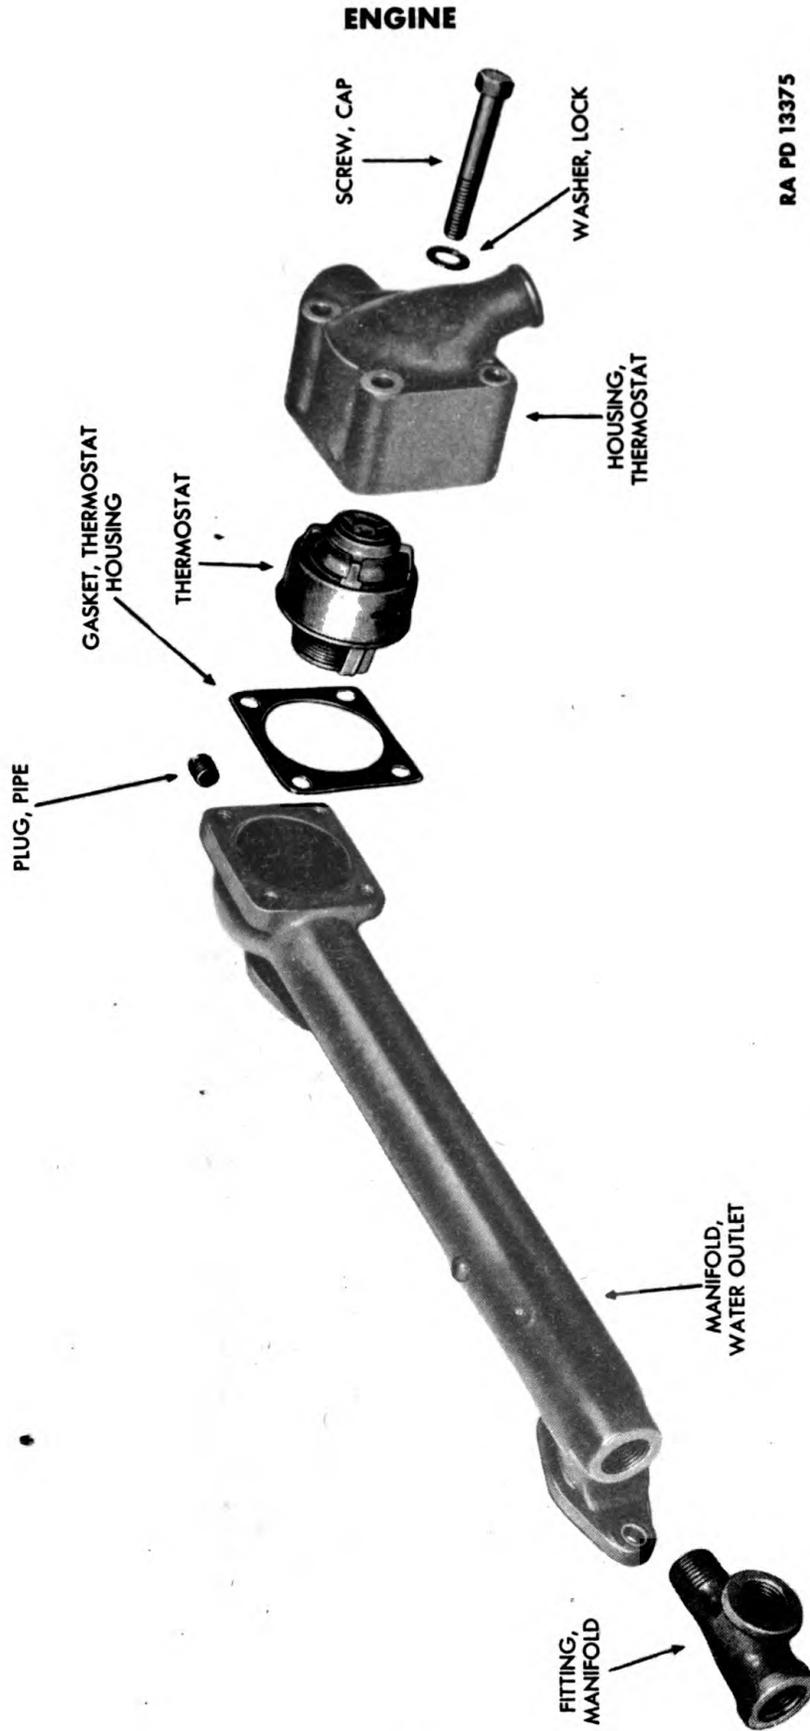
Water Outlet Manifold and Thermostat Housing Assembly—Exploded View
